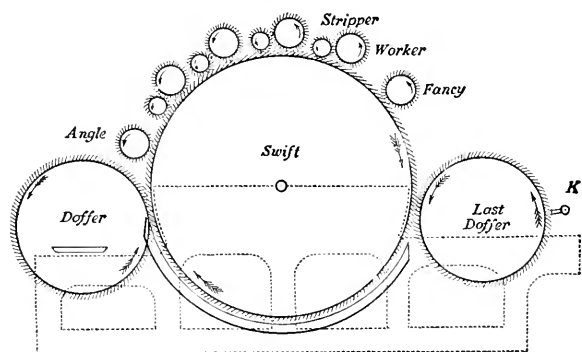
WORKING PARTS OF A CARDING MACHINE.
